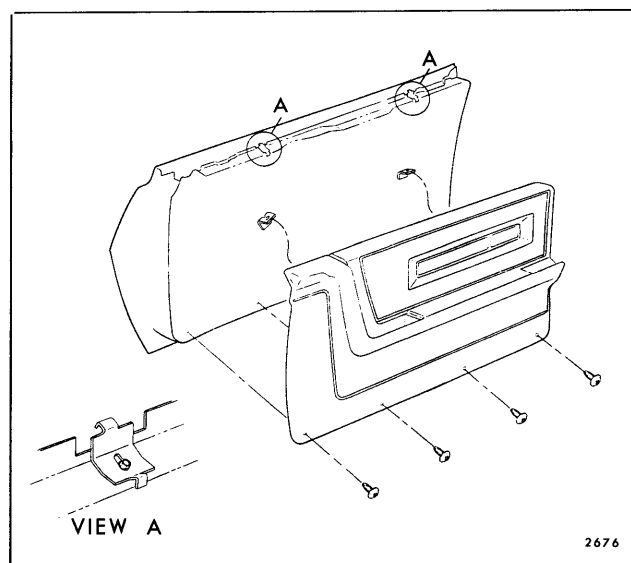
Door Trim Assembly Adjustment - Cadillac "E" Style Shown
